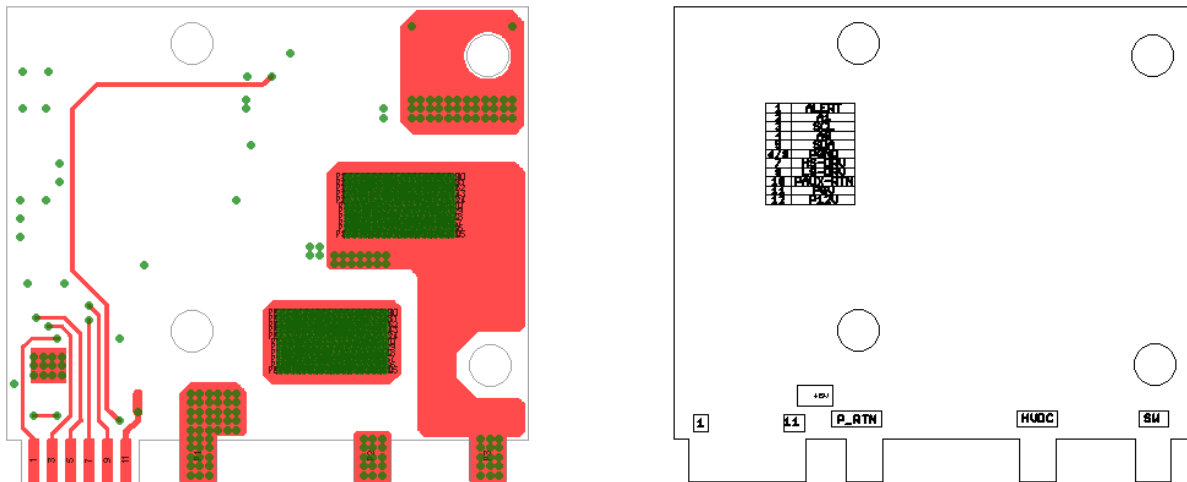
Top Layer PCB Layout and Assembly Plan of SLOW LEG CARD
